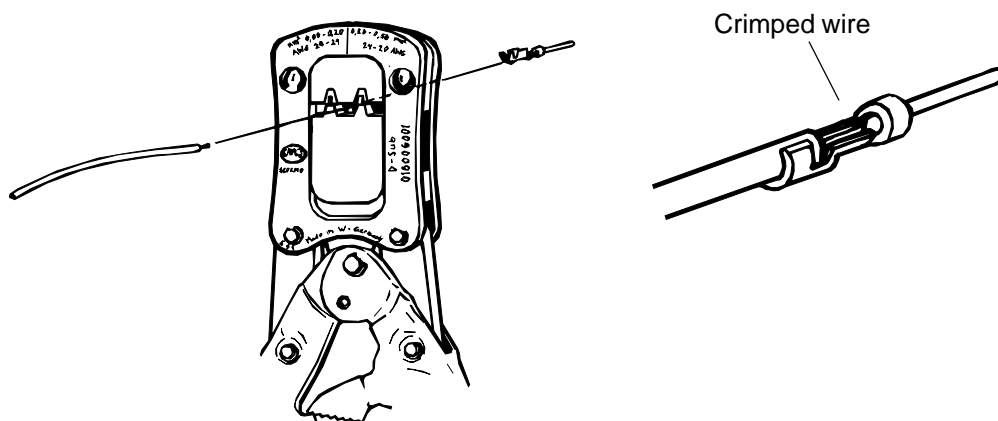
Crimping of wire (crimp tool LSD 319 11).
